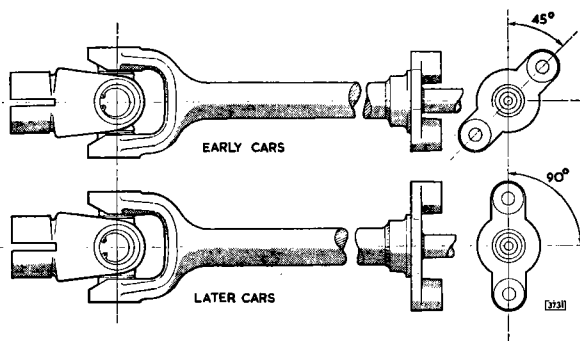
Showing the 45° and 90° phased lower steering columns
